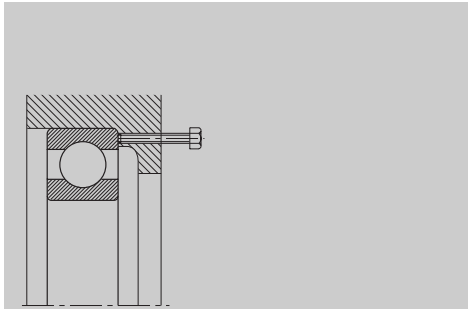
Dismounting of Outer Ring by using Dismounting Bolt
